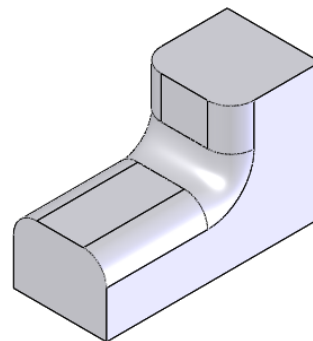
Face deleted with the Delete and Fill radio button selected
